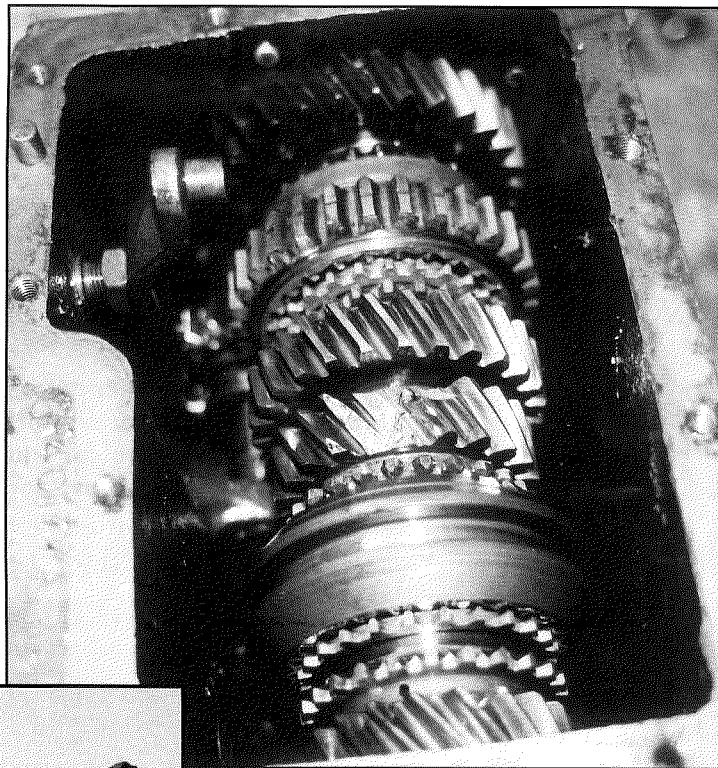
(above) : Teeth sheared of 3rd gear by sudden force showing crystalline fracture.
